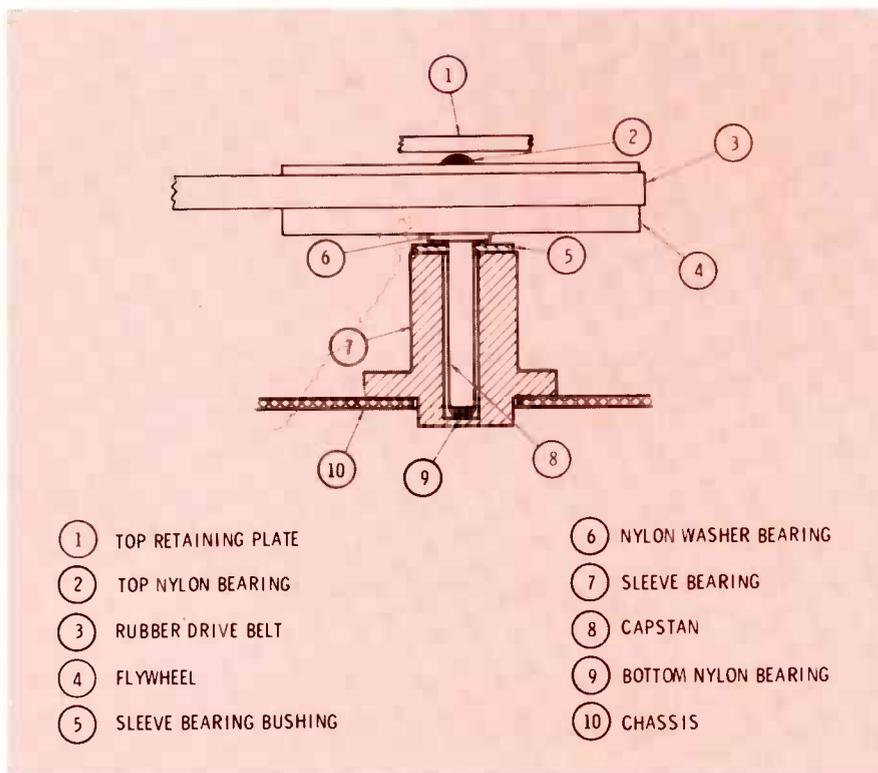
A typical tape-drive system used in eight-track players. Clean all bearing surfaces and inspect the nylon-tip bearing at the bottom of the capstan.
